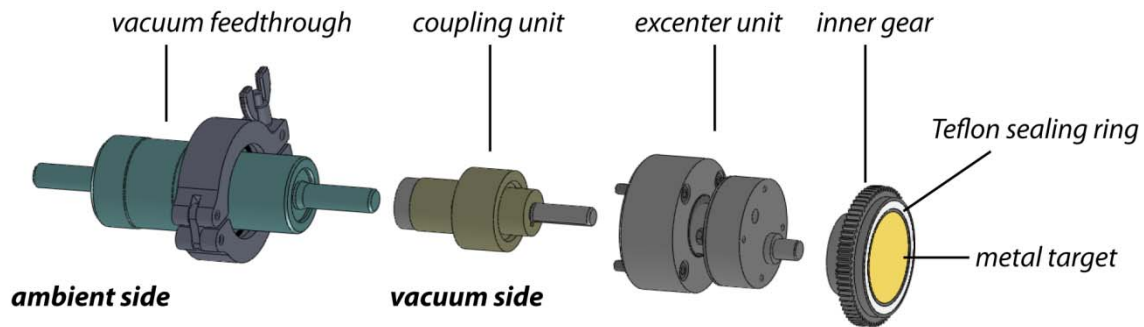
Motor-driven assembly with the metal target mounted onto the inner gear. The motor unit on the ambient side is excluded from the diagram.
